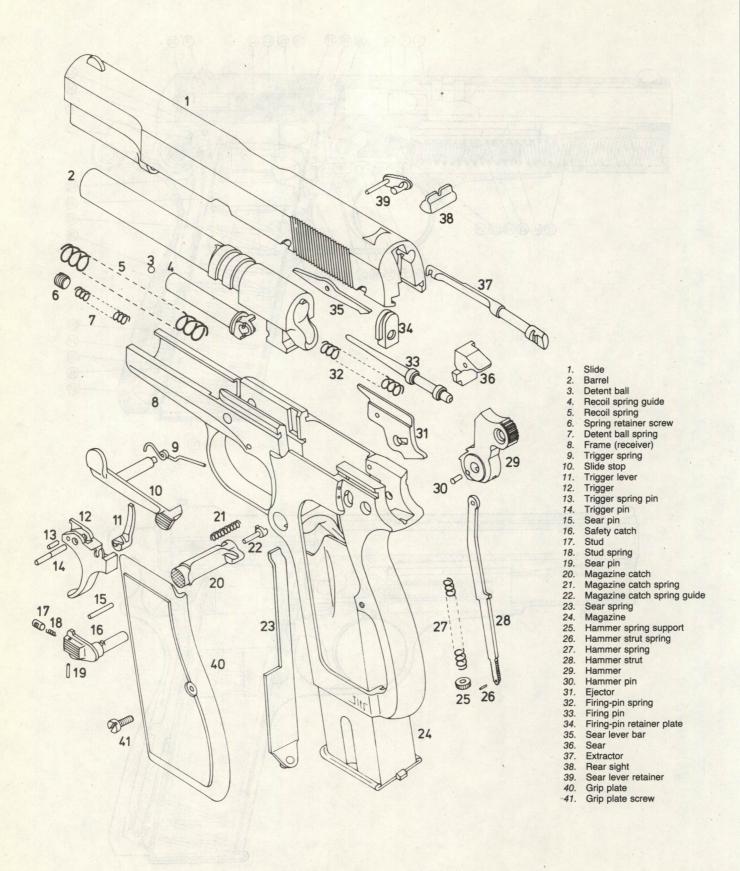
Exploded view of the 9mm Parabellum FN Browning-Saive Modèle 1935 GP pistol. (Jimbo)
